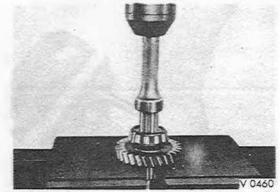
Removing the cone of tapered roller bearing from the transfer drive shaft.
